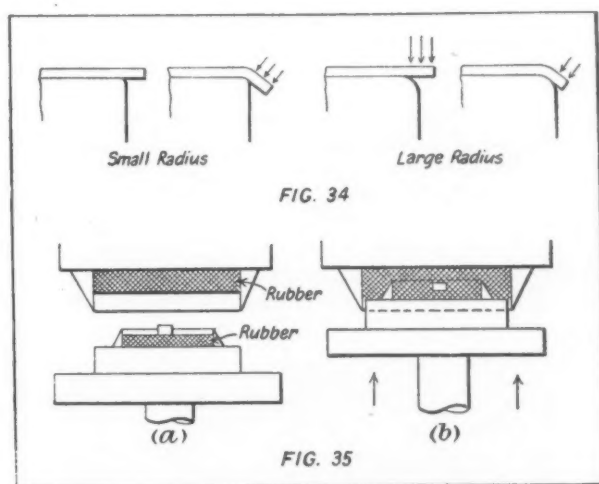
Views Showing why a Small Radius is Preferable to a Large Radius for Forming Small Flanges. Fig. 35. A Typical Set-up Employing an Auxiliary Rubber Bed
